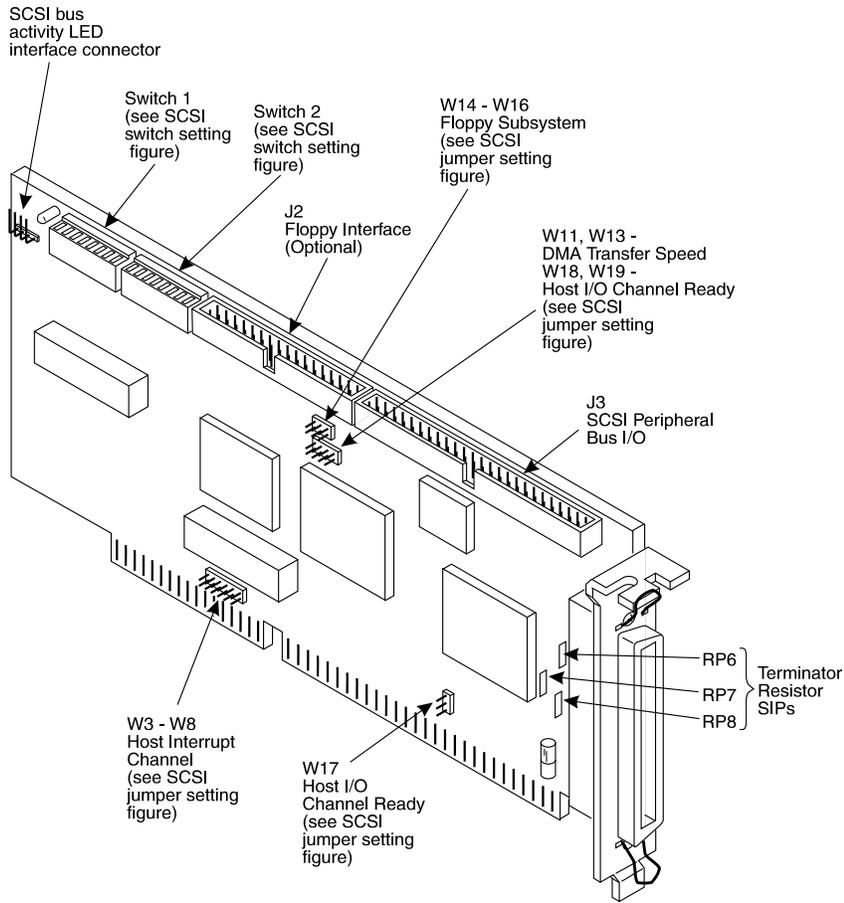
SCSI Host Adapter Controller Circuit Card
